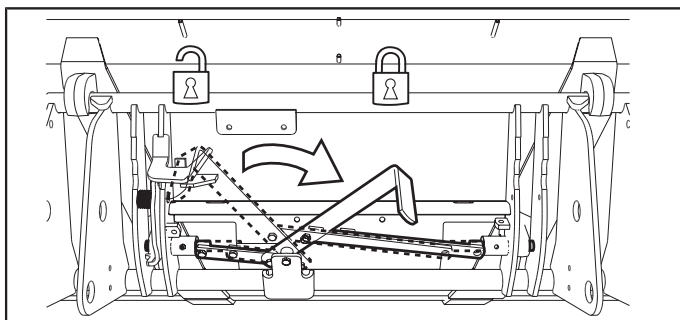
Example: The locking lever indicates locked implement (locked padlock symbol)
